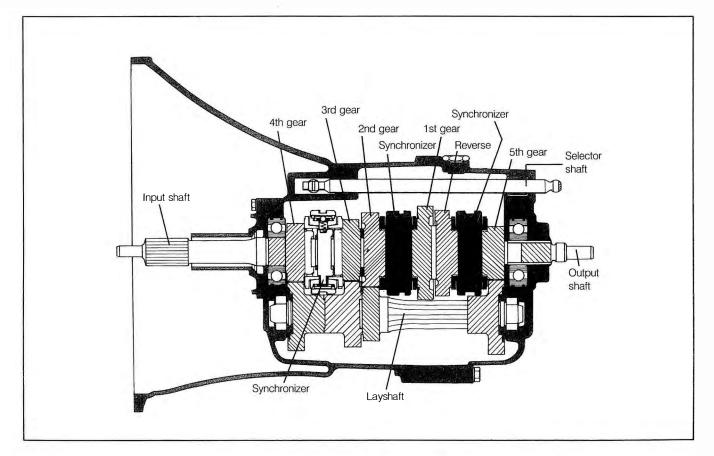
Cross section of manual transmission showing position of gear train.
